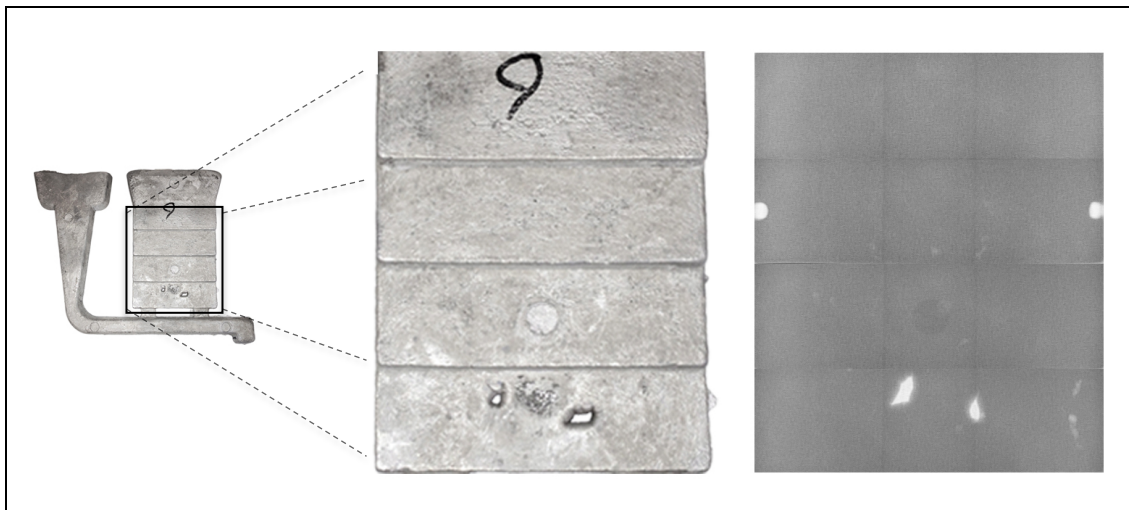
Macro-focus X-ray image of an AM60B step casting obtained by the existing die, showing the presence of macro porosity in the thinnest step [38].
